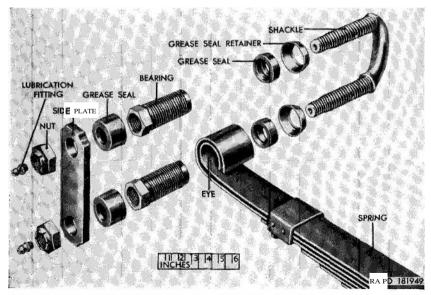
(A dded) Spring shackle and .spring shackle end of spring M170 exploded
